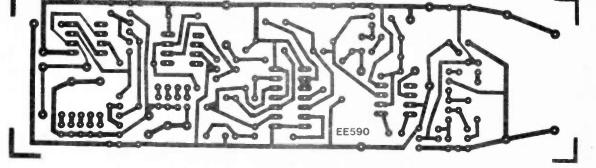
Printed circuit board component layout, interwiring details to case mounted components and full size underside copper foil master pattern. This board is available from the EE PCB Service, code EE590.
